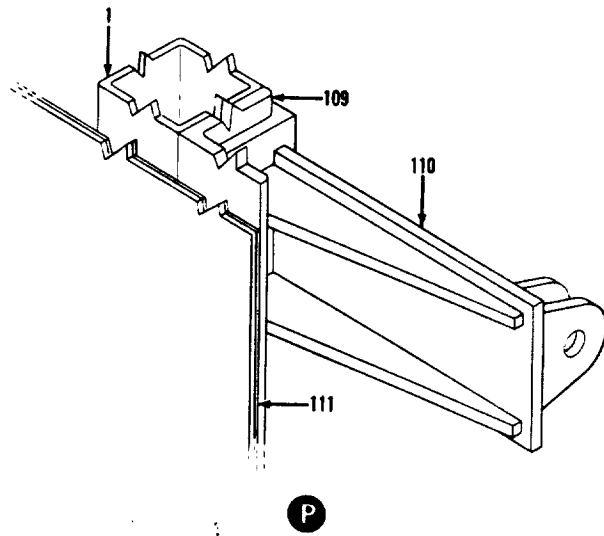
Extension Platform Assembly (Sheet 10 of 13)
